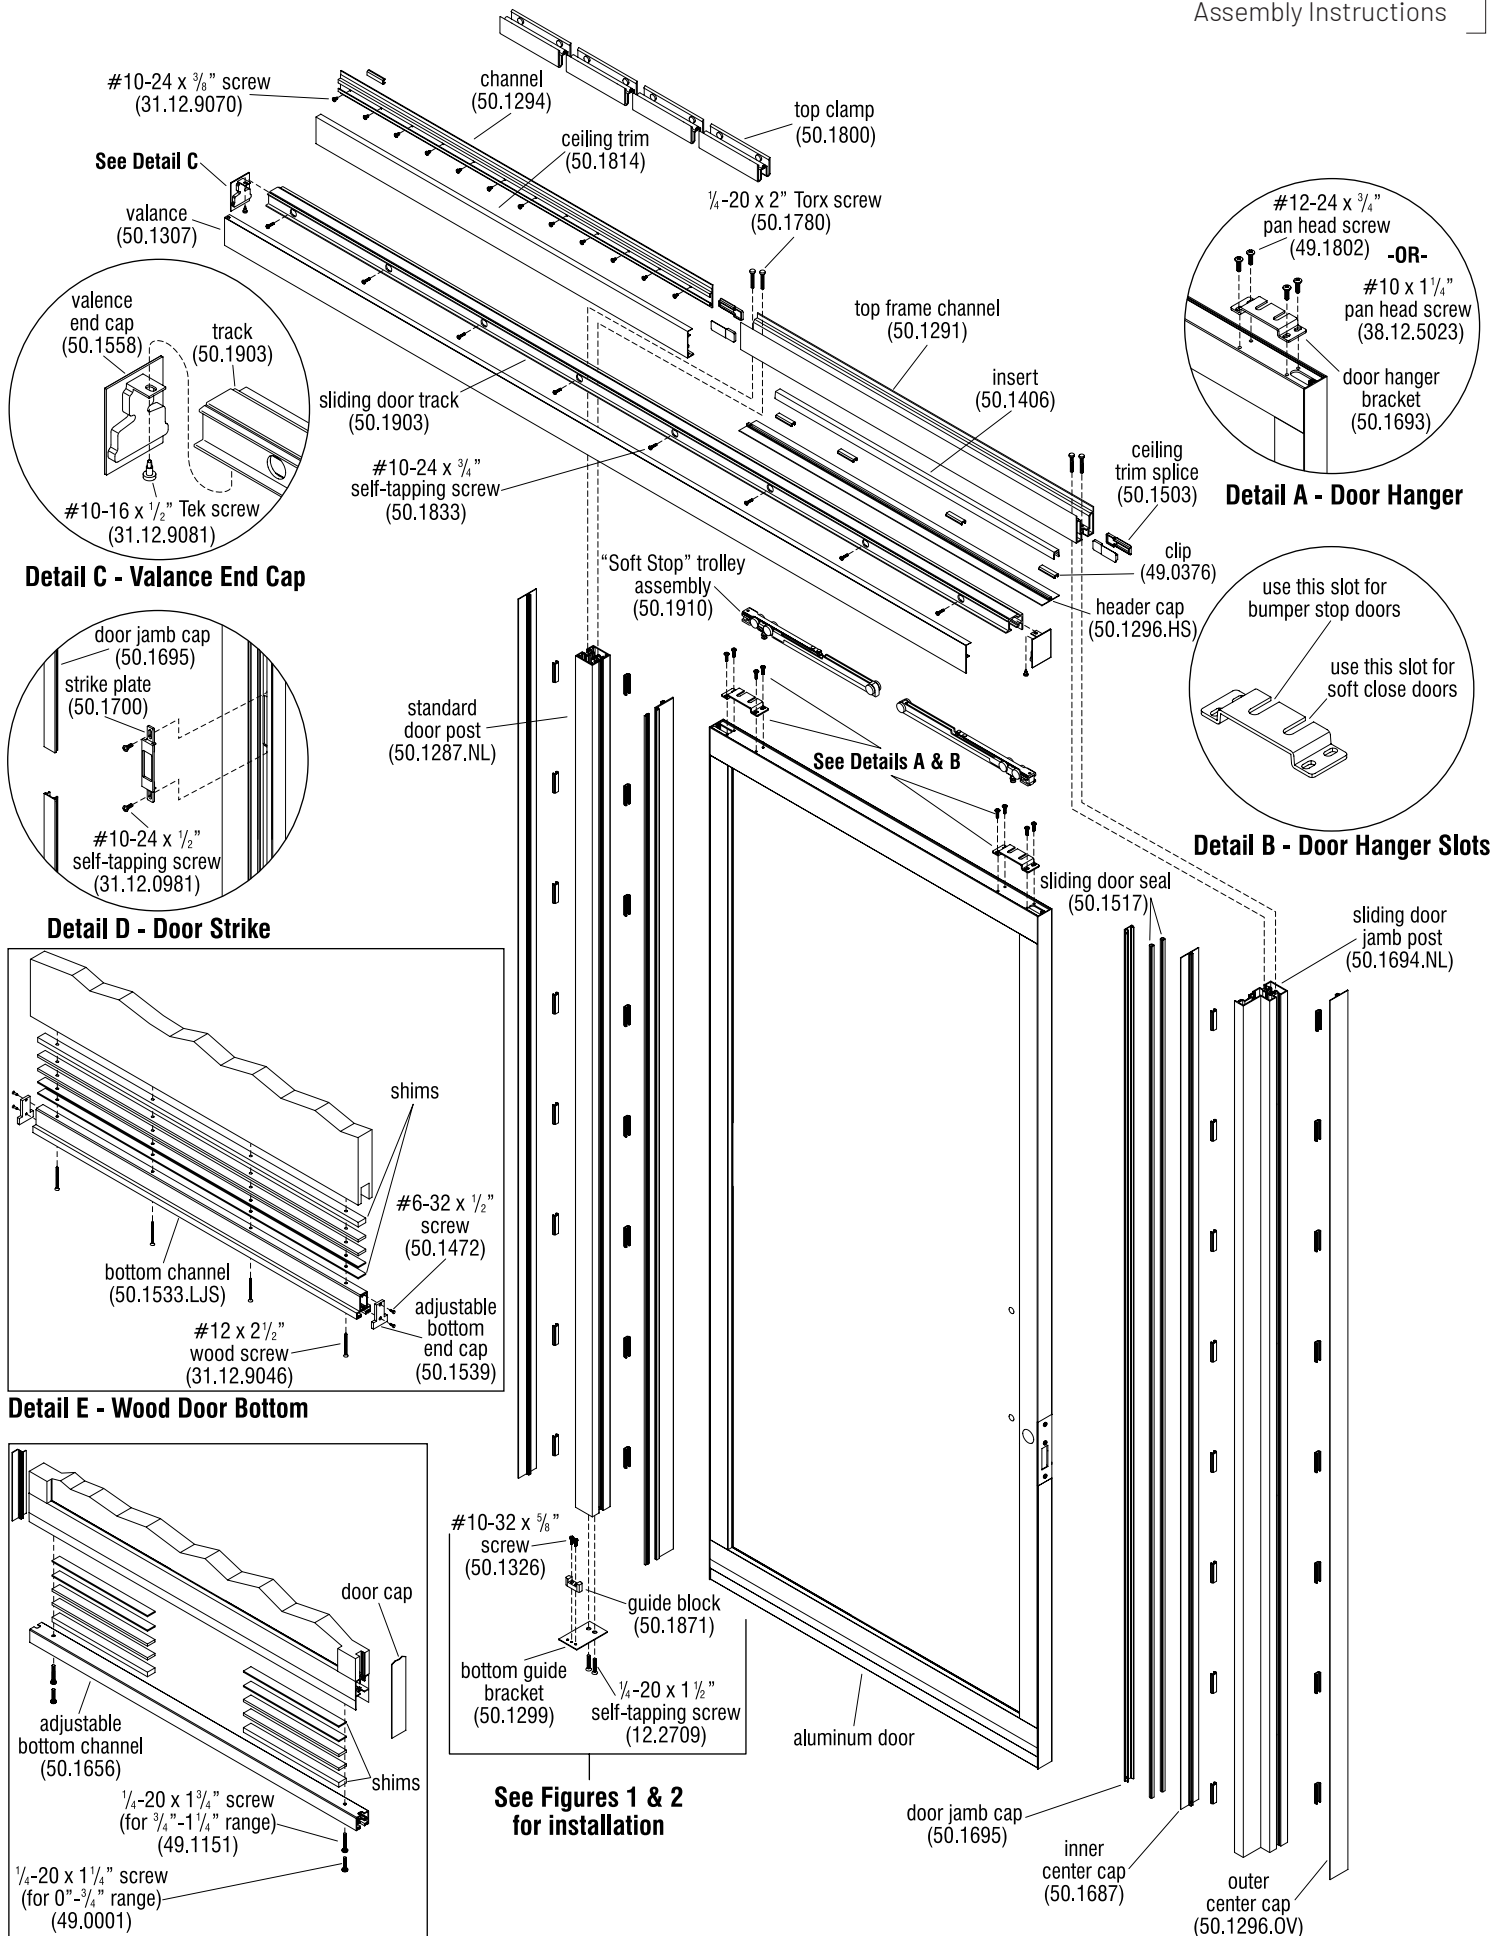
LJS-A/LJS-W Full Height Aluminum/Wood Sliding Door (Phase 3)
